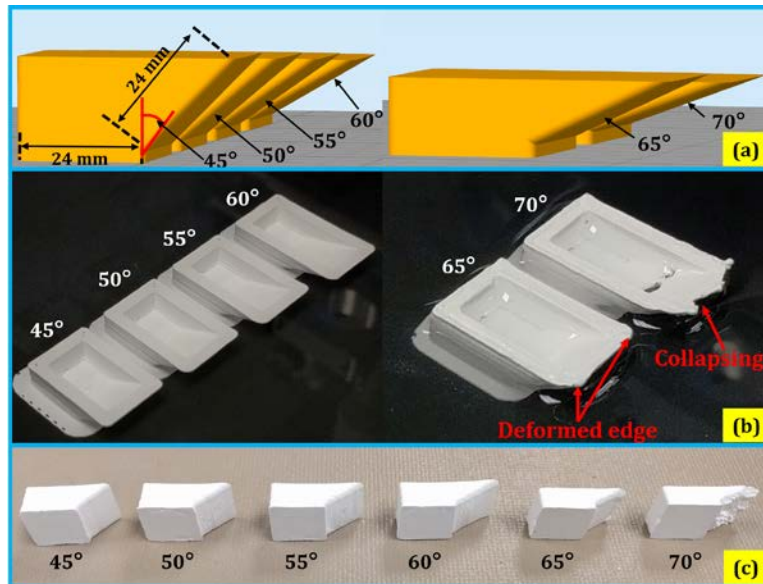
Wedge-shaped test parts attempted: (a) CAD models, (b) As-printed parts surrounded by oil in a tank, (c) Dried parts.
